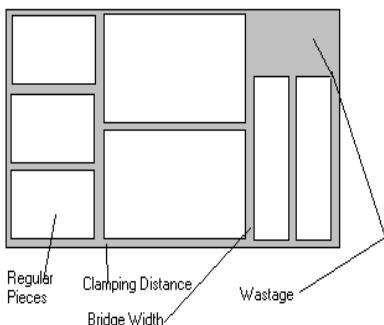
Cutting of Regular Parts (All rectangular parts) from a Rectangular Sheet
